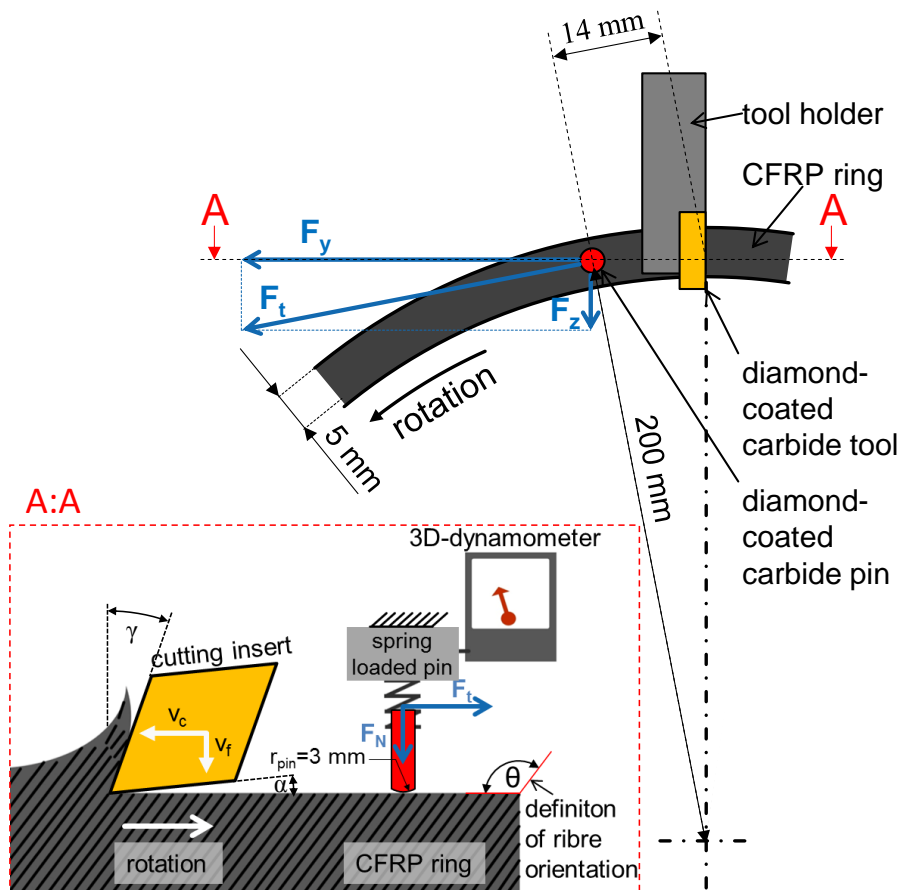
Scheme and geometrical conditions of the cutting-process-tribometer (CP-T); published in [235, 236]
